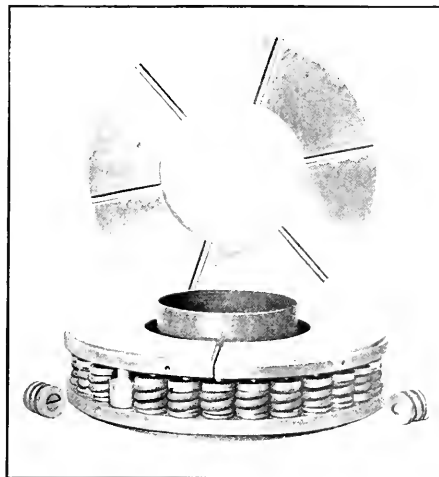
SPRING THRUST BEARING WITH "COMPRESSED SPRINGS" FOR MACHINES HAVING SMALL CLEARANCES
